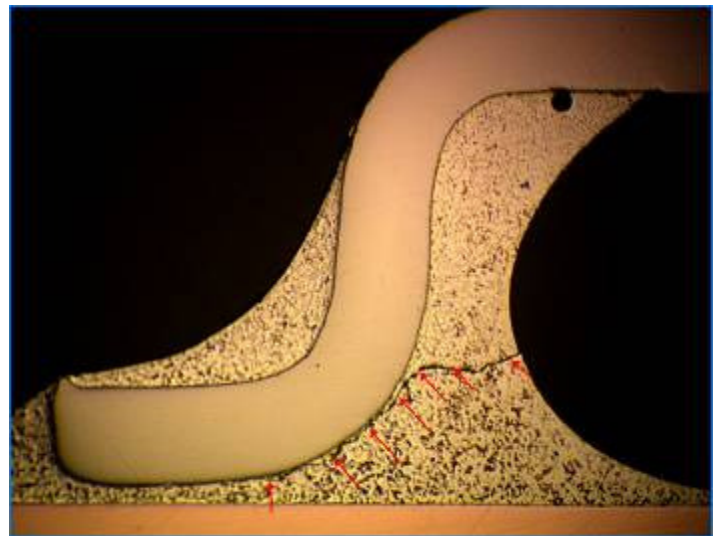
cross section, SN63, U61, left lead solder crack, 100x
